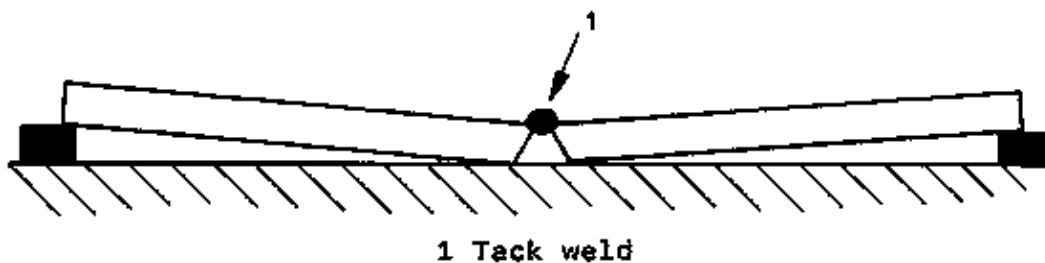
Roof-shaped tacking of the plates for the V-weld
